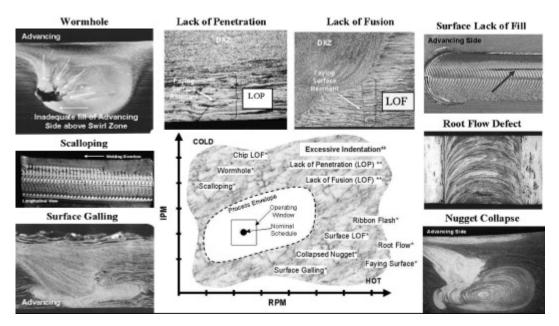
Processing Map and Correlating Weld Defects
